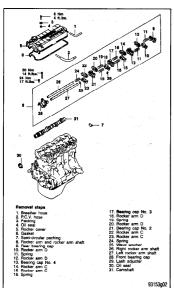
Camshaft, rocker arm and shaft assemblies-2.0L SOHC engine
